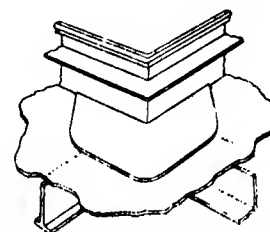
Outside View of Hatch Corner in Upper Deck of New Liberty Ship. The 20-Lb. Doubler Is Shown on Top of Deck and Covering Insert Plate
